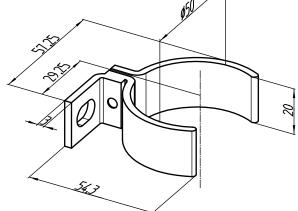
Dimensional drawing of the stainless steel supporting bracket (2026849)
